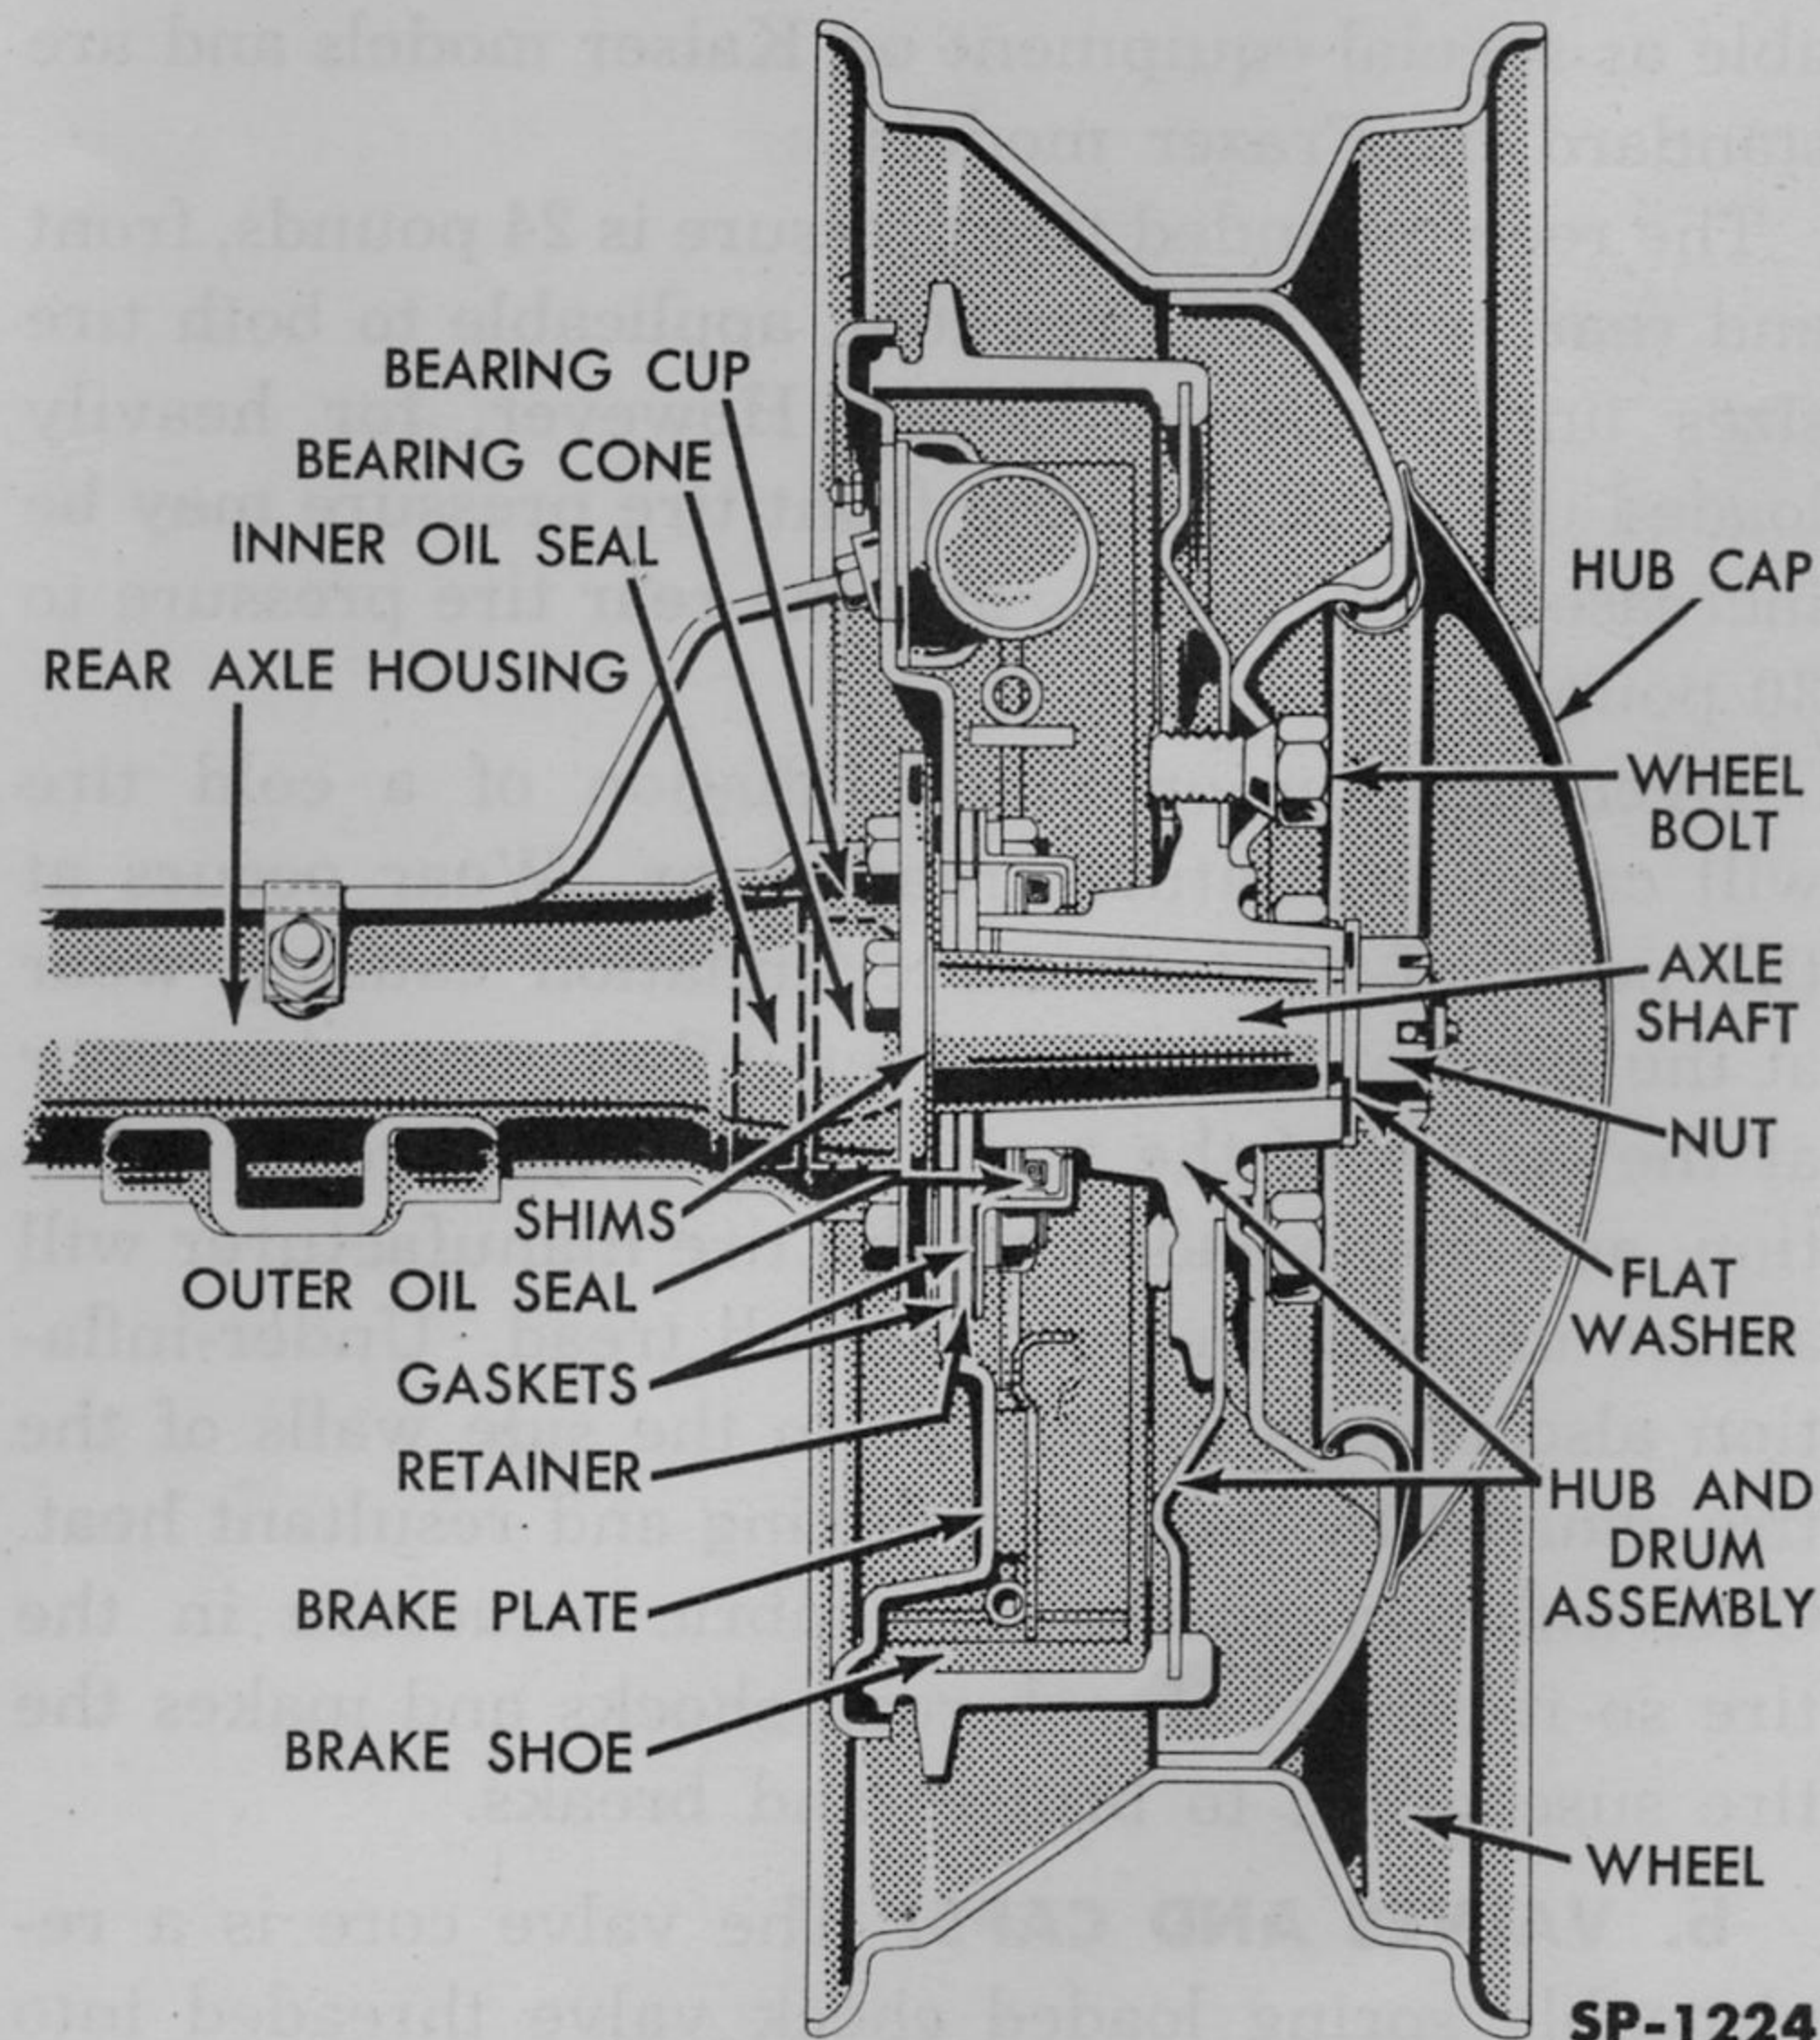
Sectional View of Rear Wheel and Hub Installed
